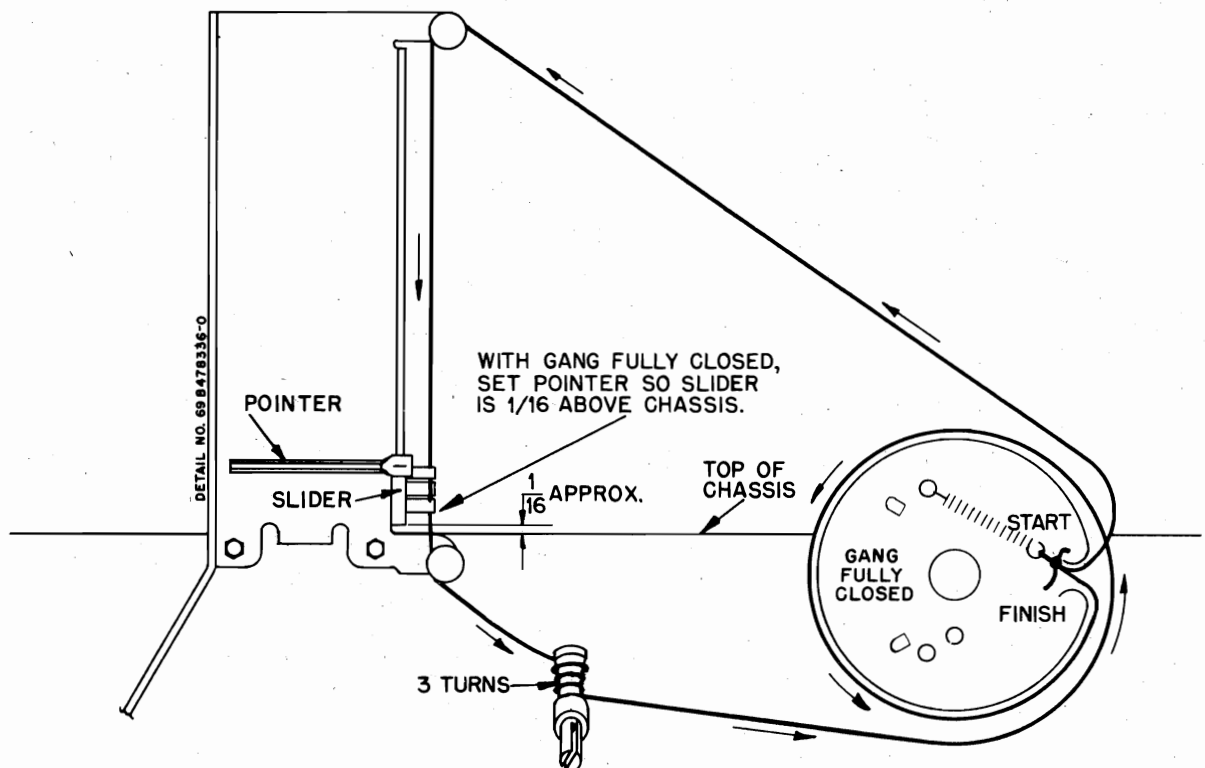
CHASSIS HS-124 STRING DRIVE DETAIL
